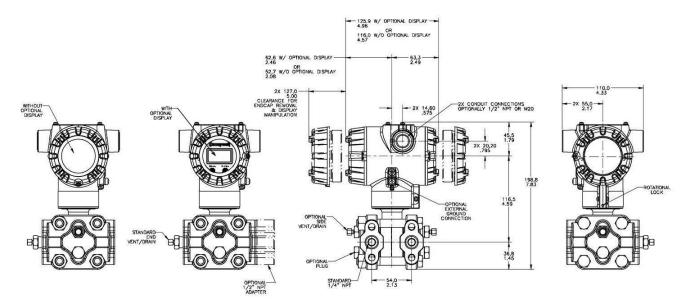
Typical mounting dimensions of STD725, STD735 & STD775 for reference only
